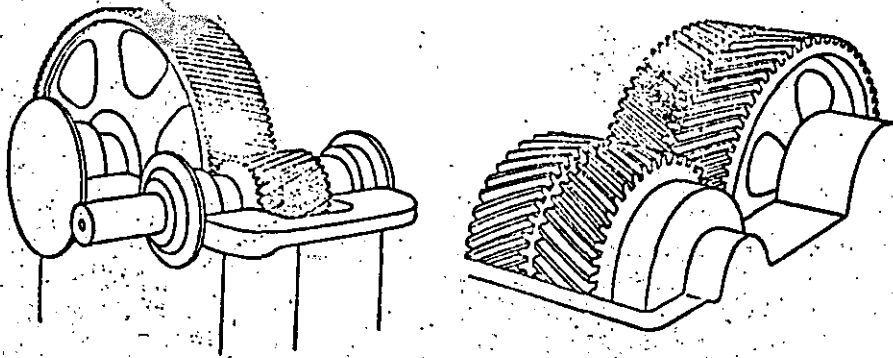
Types of spiral gears: left, helical gears; right herringbone gears. (From Lubrication, published by The Texas Co.)
